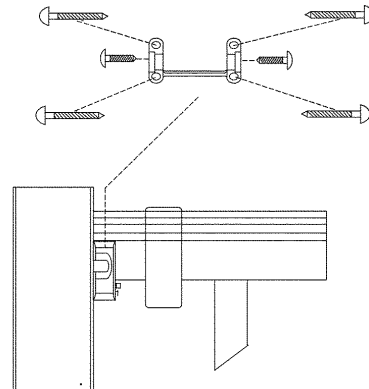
GUARDRAIL SYSTEM BRACKET PROFILES
